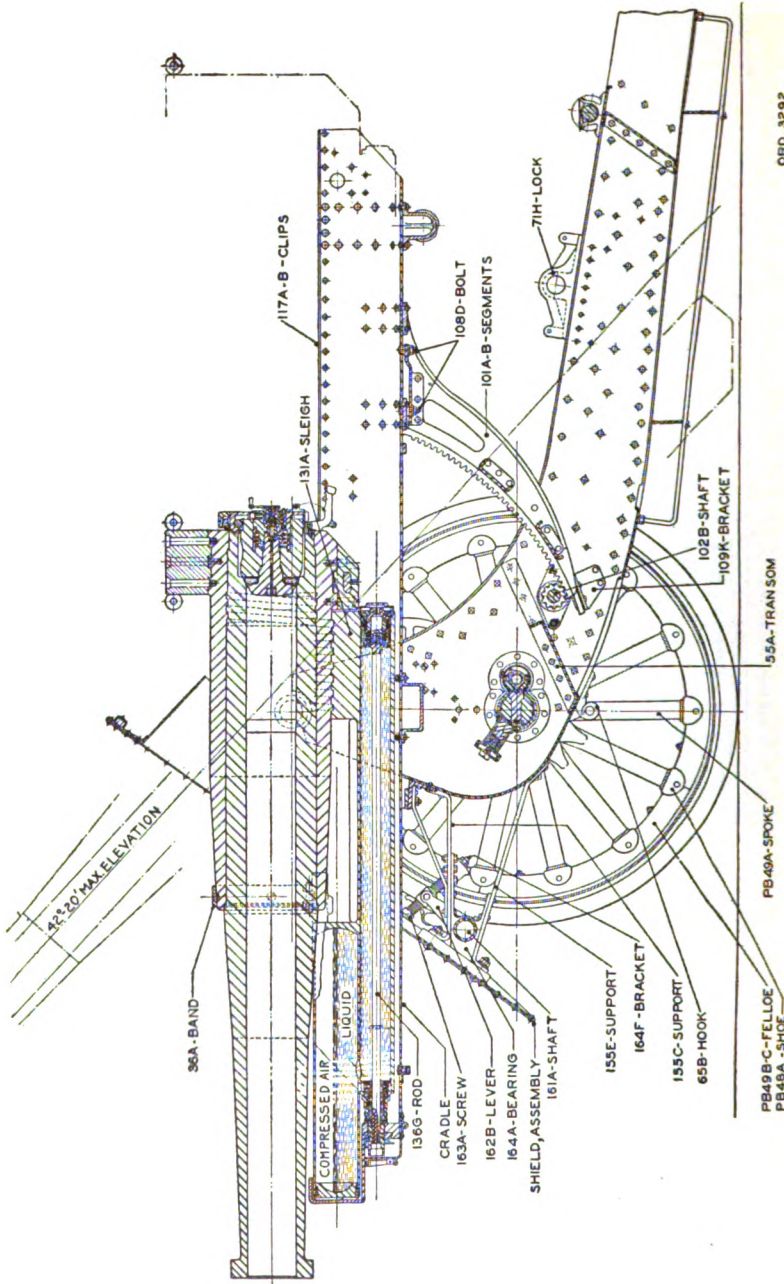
155-mm. howitzer and carriage, M1918—assembled view, traveling position
